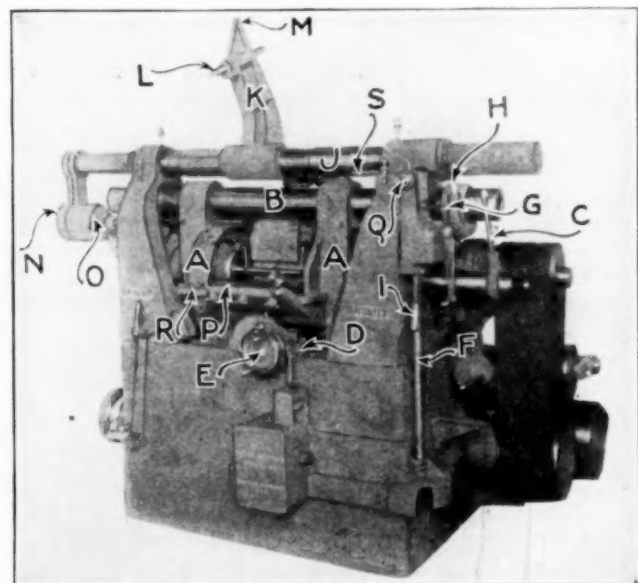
BRYANT FORM-GRINDING MACHINE, FRONT VIEW
